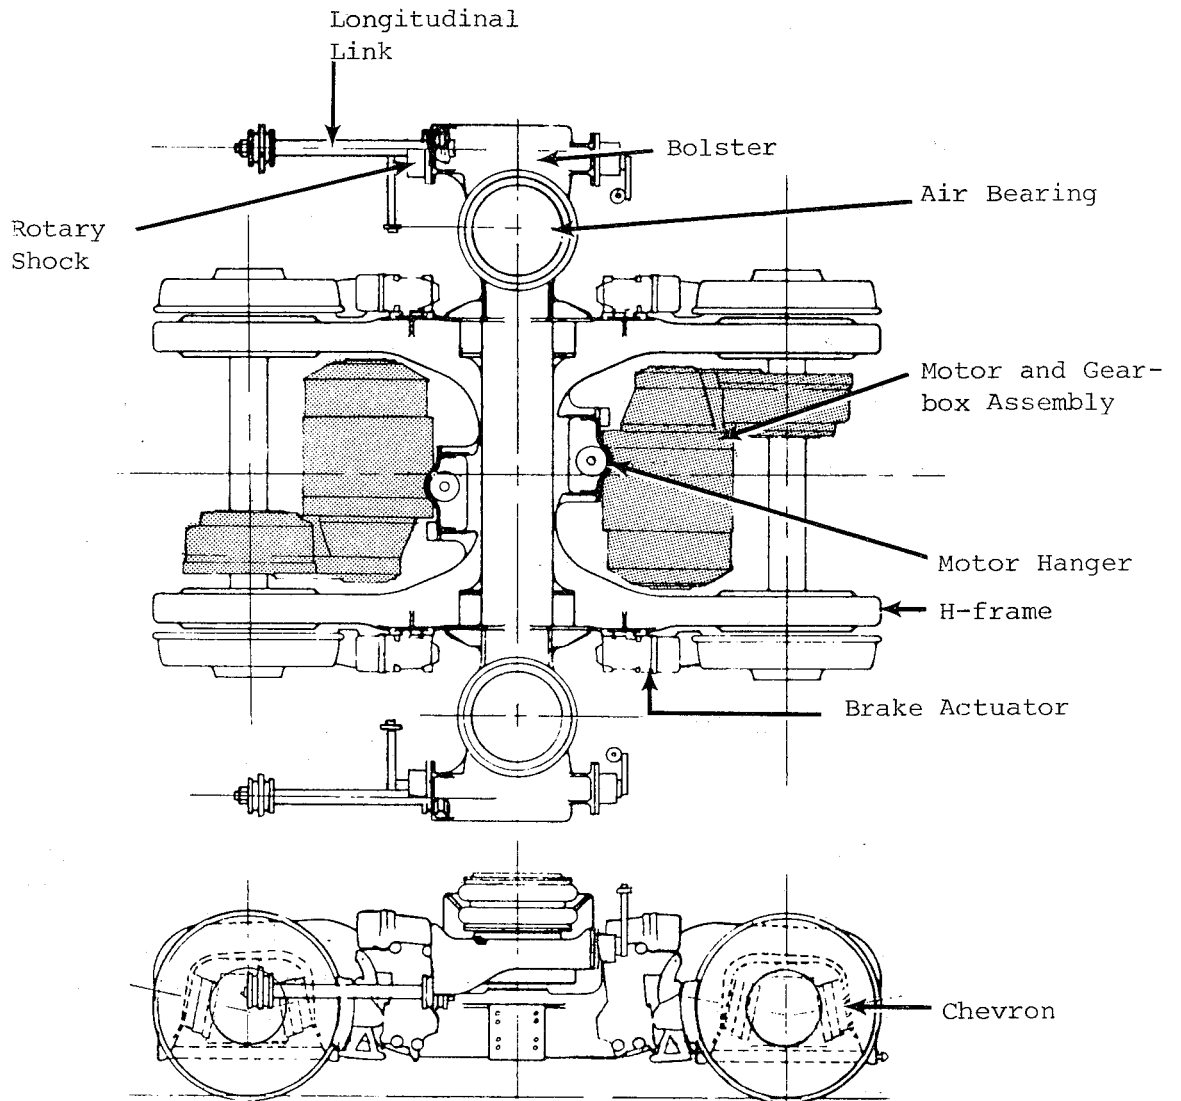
SOAC TRUCK ASSEMBLY.
